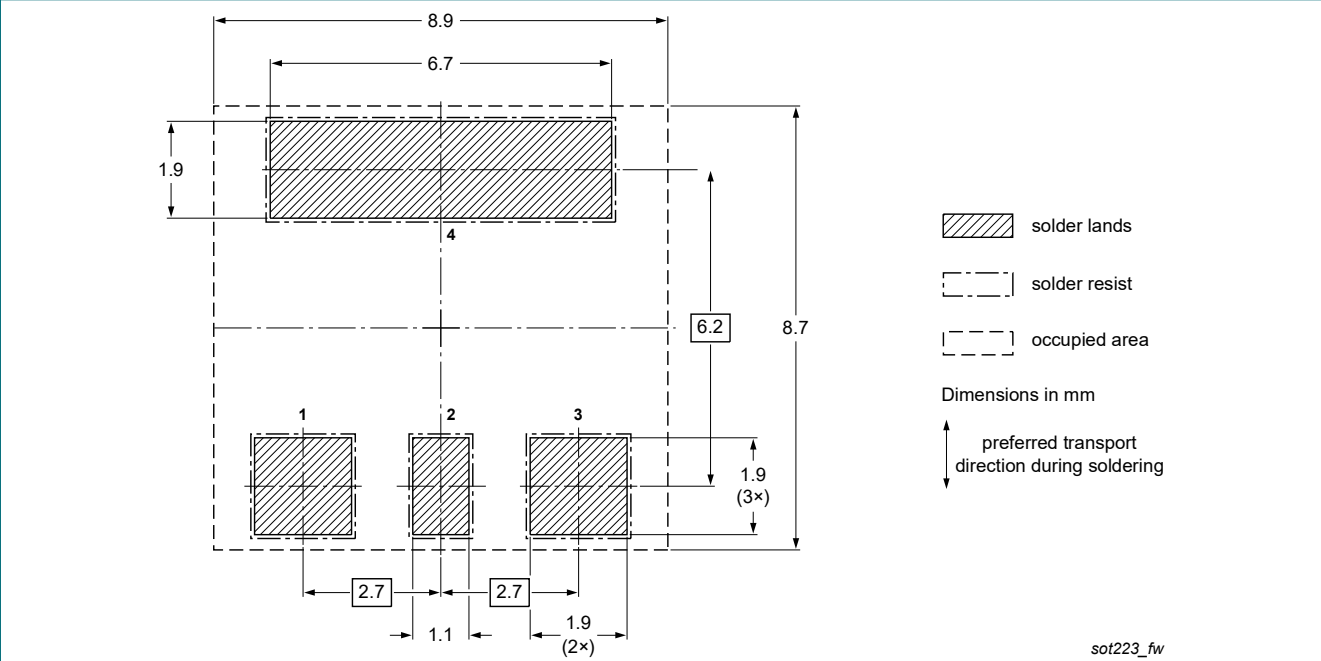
Wave soldering footprint for SC-73 (SOT223)
